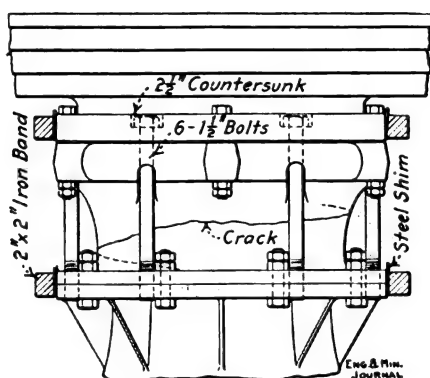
REPAIRING CRACKED SHELL OF A GYRATORY CRUSHER.
